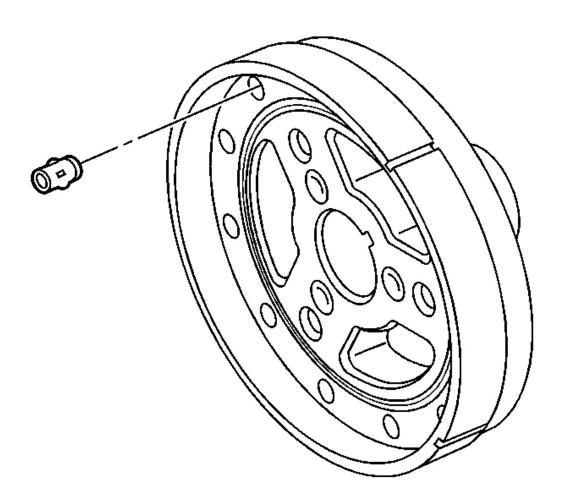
View Of Crankshaft Balancer Weights Courtesy of GENERAL MOTORS CORP.
